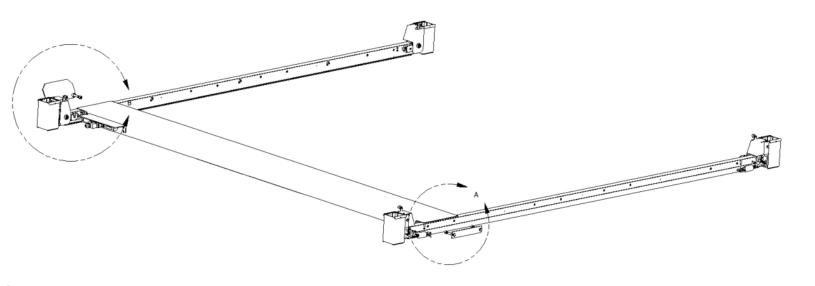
powered runway bolted to lower cross member with ramp retainer and wheel stop.
